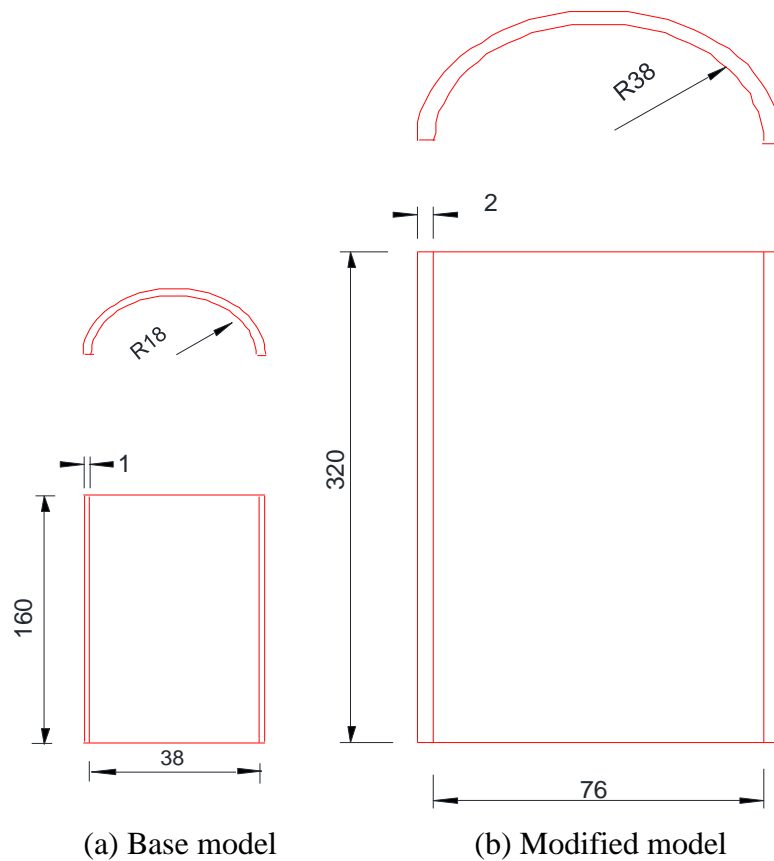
Dimensions (mm) of the semicircle shaped wind turbine blade
